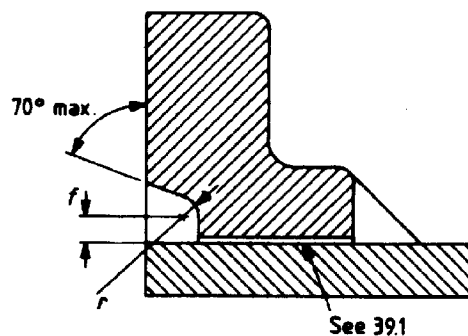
Typical 'bore and fillet' welded-on flange for positional welding
